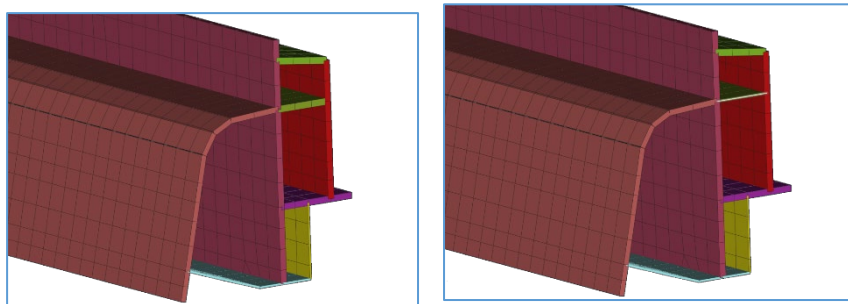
(a) Left: Initial rocker design, (b) Right: Modified rocker design
